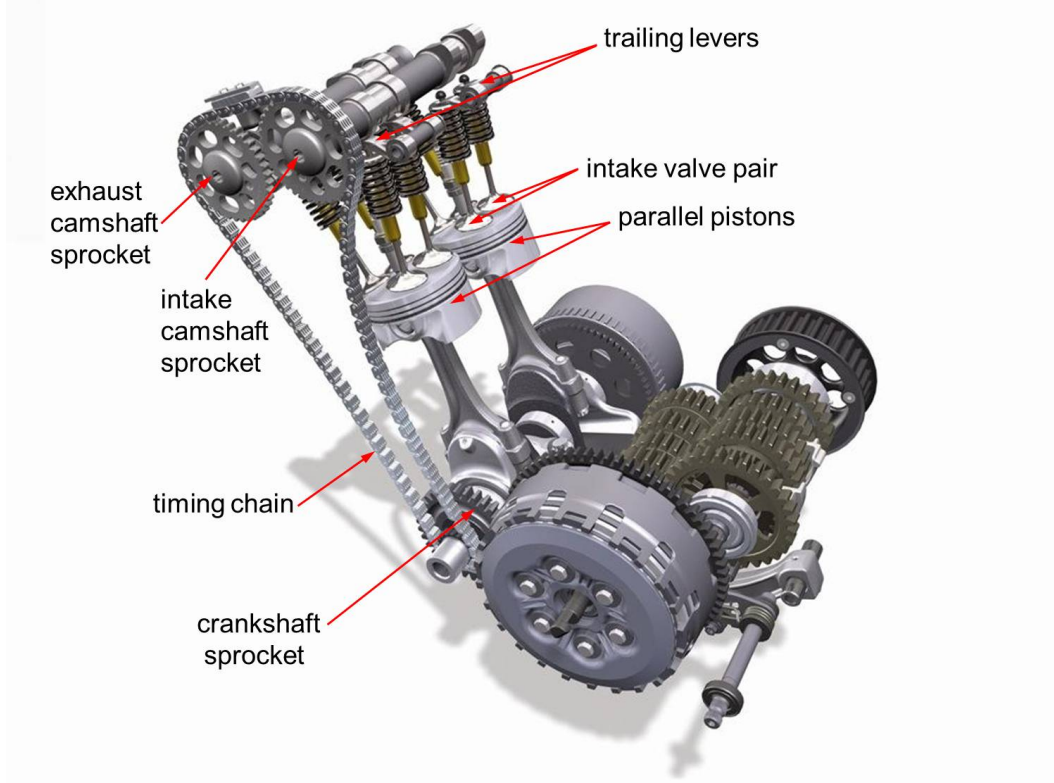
Crankshaft and valve train assembly of the BMW K71 engine [5]
